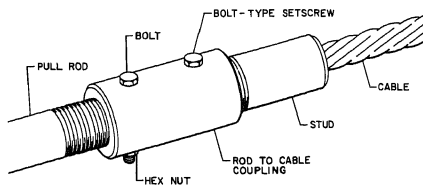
Cable stud end and pull rod in rod-to-cable coupling.
